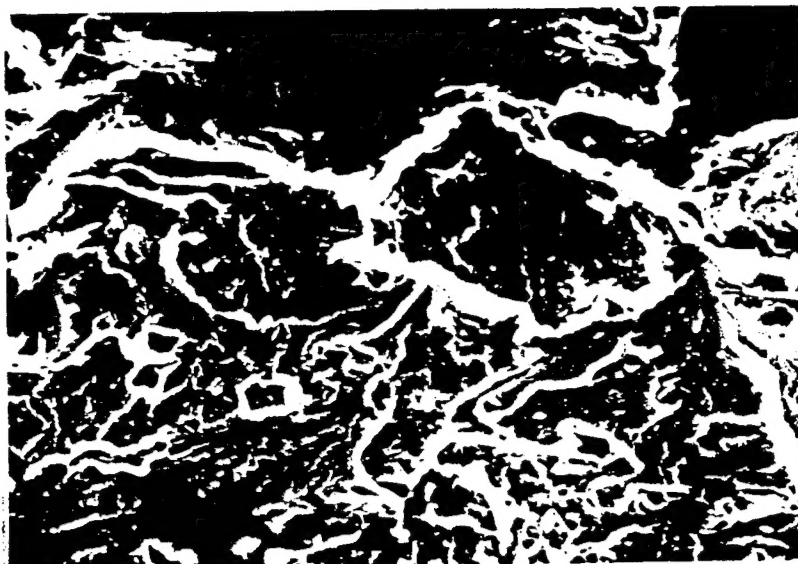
Cleavage Fracture; 1000 X; at 0.6 mm depth
